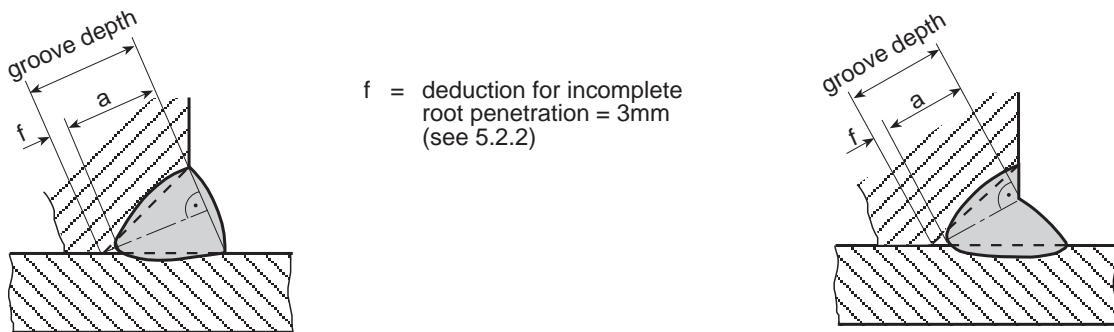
Effective throat thickness "a" of partial penetration groove welds
